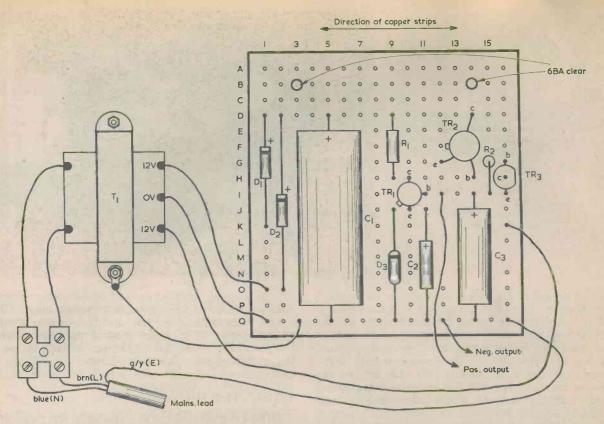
Wiring up the eliminator unit. All the small components are assembled on a Veroboard module
